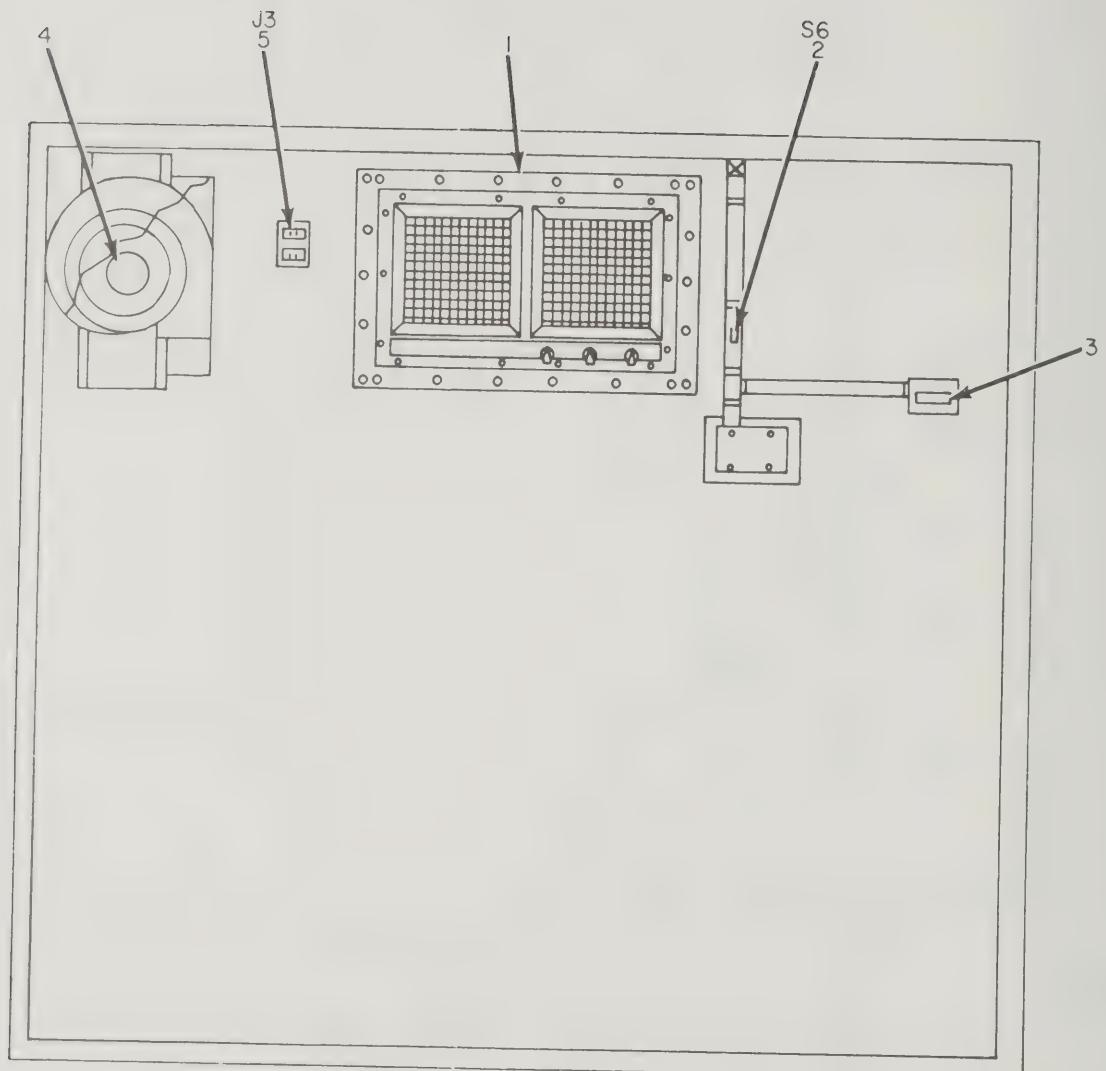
Shelter Facility S-376/TCC-23, Curbside Wall.
